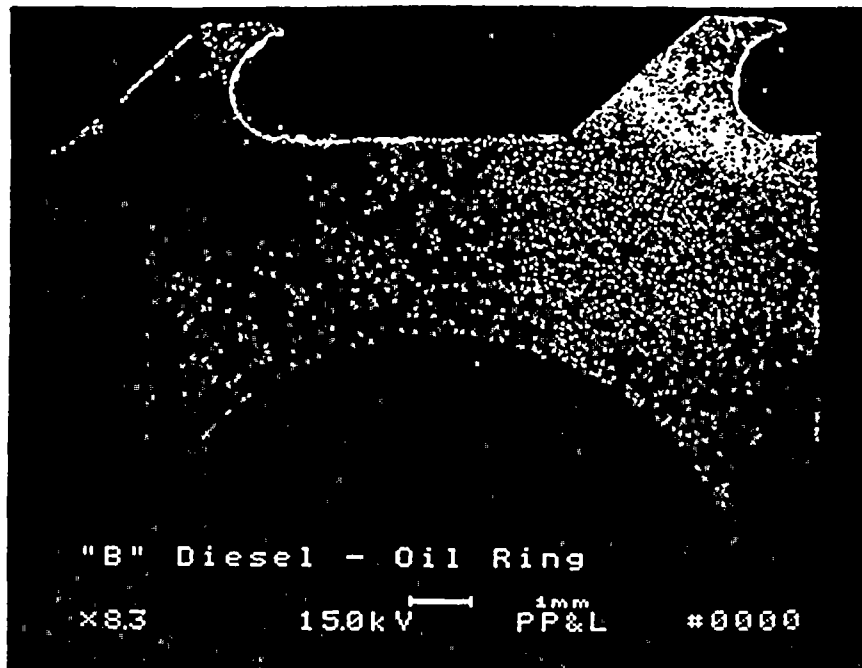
Cross section of the lower oil ring from the B diesel 7L piston showing the wear and deformation on the two wiper surfaces.
